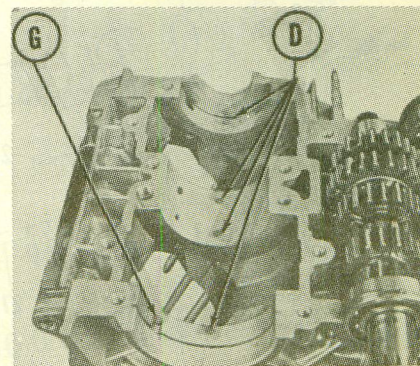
When installing crankshaft, make certain that dowels (D) engage holes in all four main bearing outer races. Align open space of snap ring (15—Fig. Y8-14) with oil groove (G).
